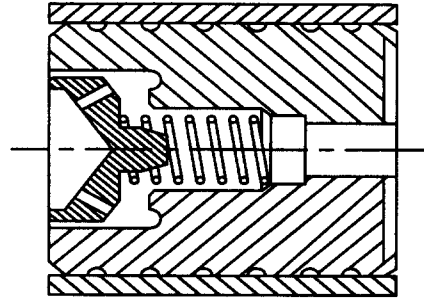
Control valve at cylinder bottom in unlock-up condition.
